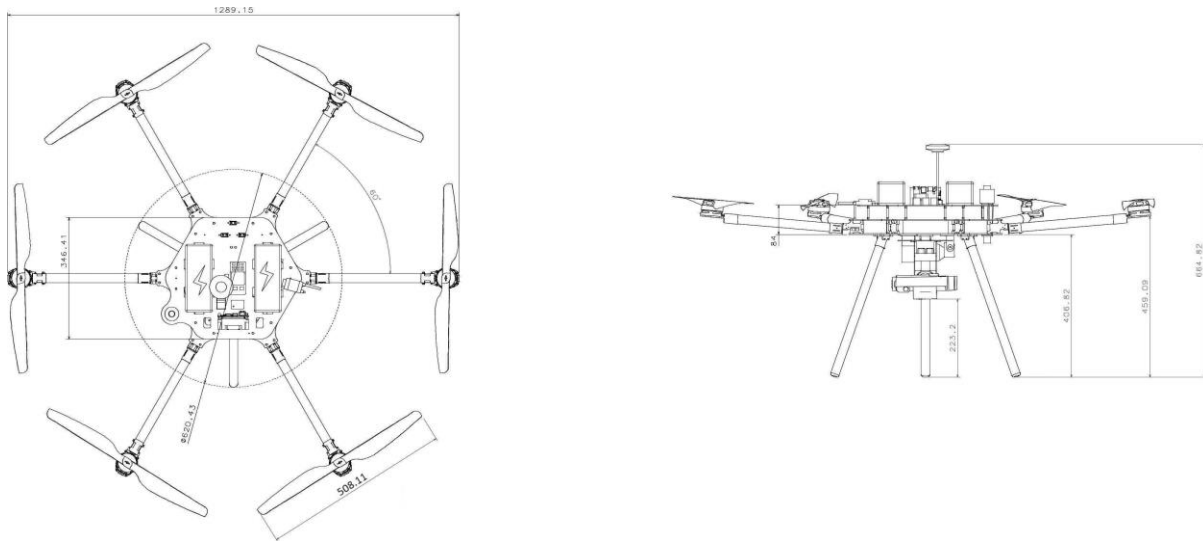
Lodos Technical Drawing: Top, Front(in mm)
